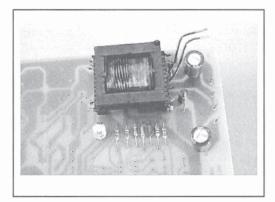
Photo of second winding on outside of existing transformer and additional PC board
